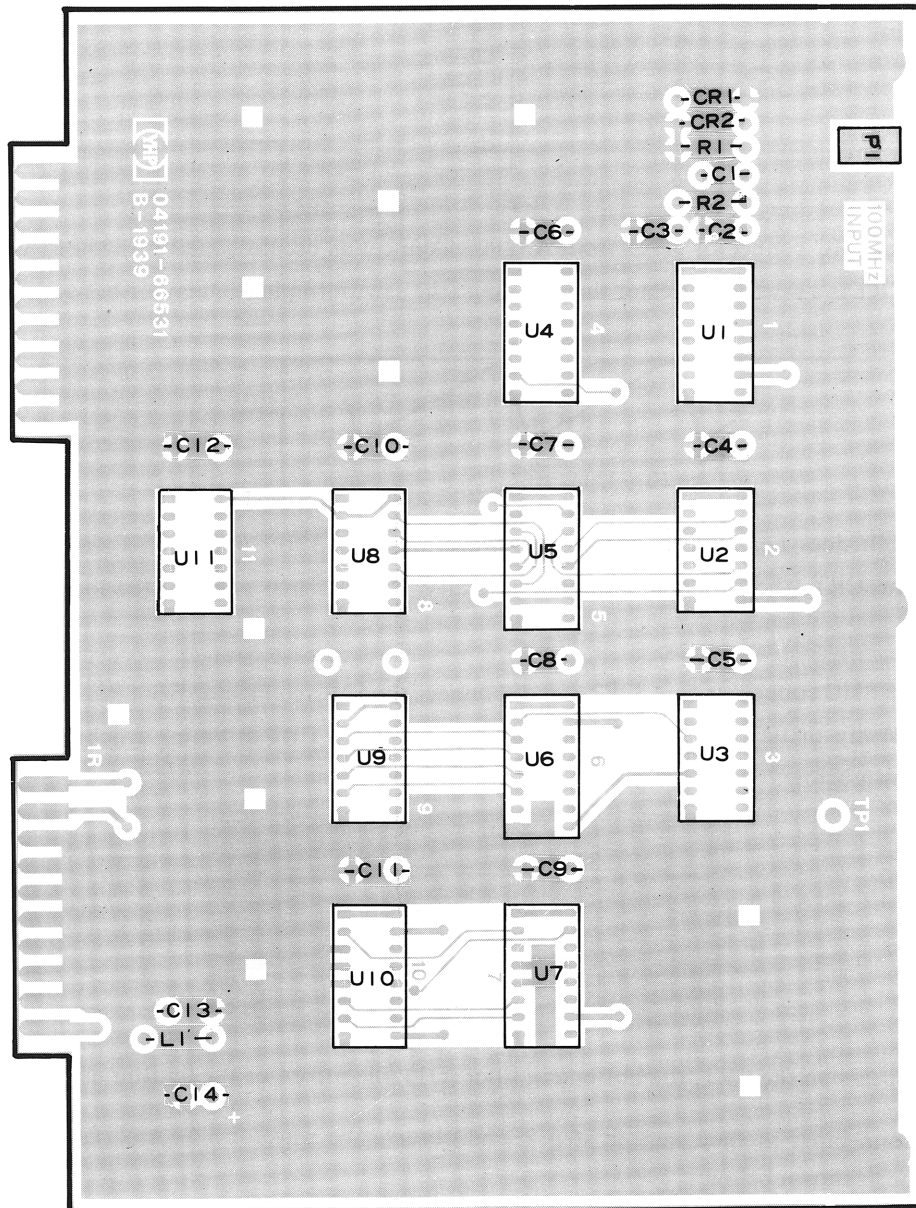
A31 100Hz Step Programmable Divider Board Assembly Component Locations.
